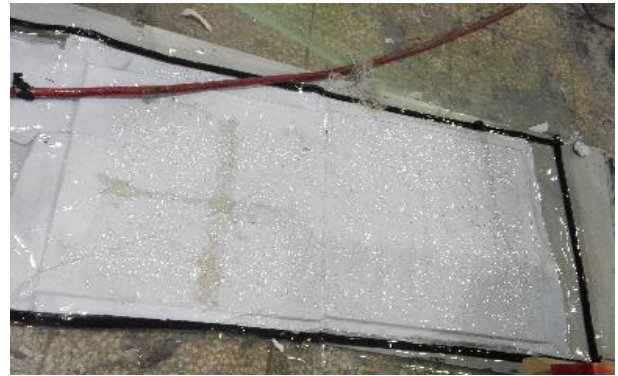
Sandwich panel samples (300 mm×300 mm) manufacturing process by vacuum bag process
